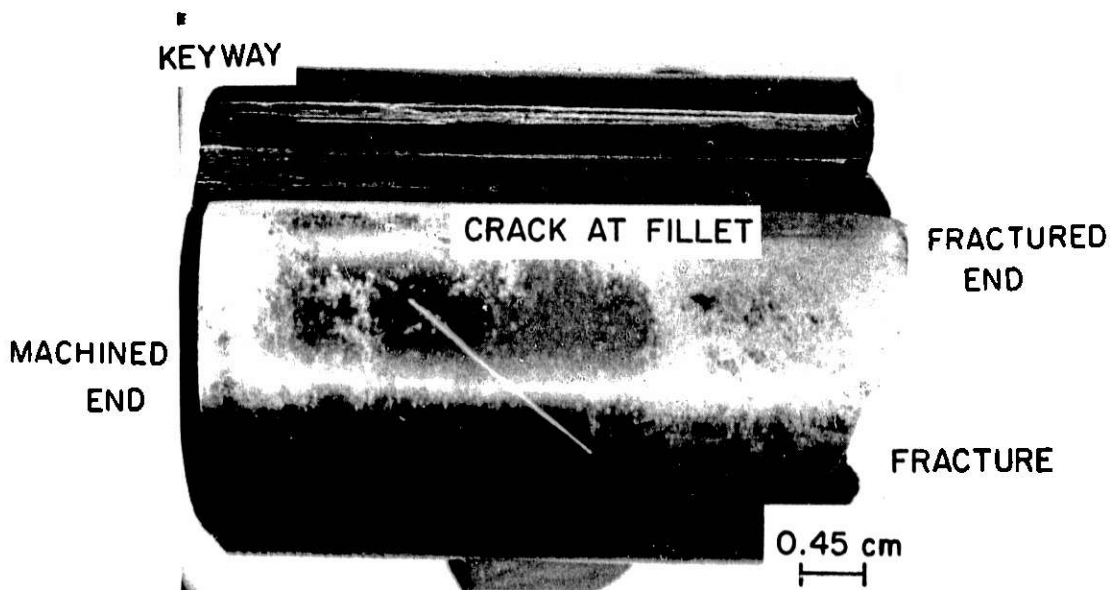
Photograph of a Fillet in the Keyway Showing a Crack Extending along the Length of the Keyway. ANL Neg. No. 306-78-45.
